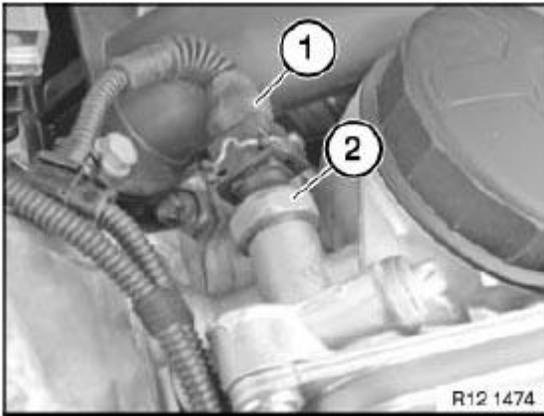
Identifying Plug Connection On Oil Pressure Switch
